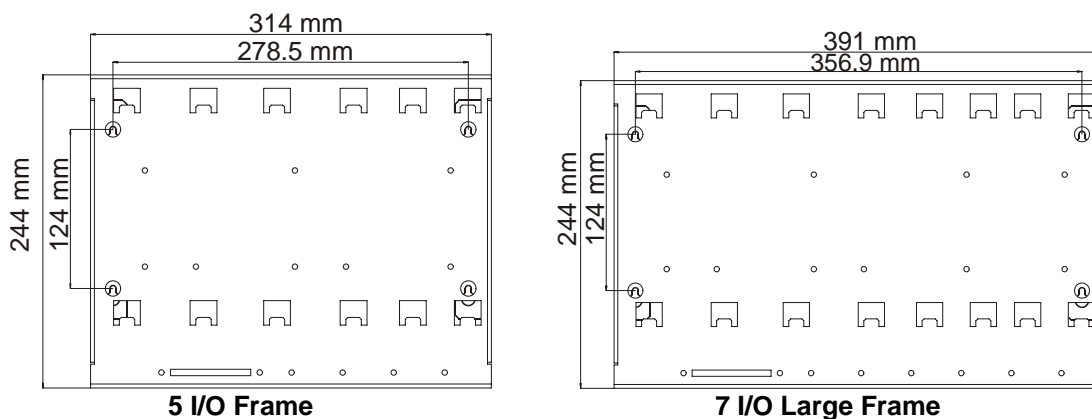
5 I/O and 7 I/O Frame Installation Dimensions and Screw Holes for Installation
